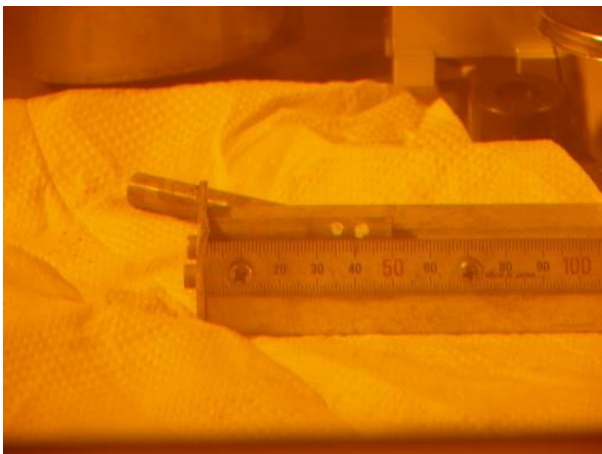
Dimensional measurement of the length of the irradiated cladding in a hot cell.
